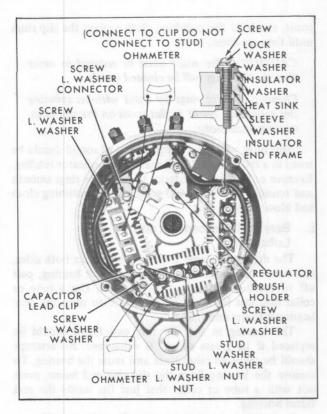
Slip Ring End Frame Parts Position (With Heavy Duty Generator)
